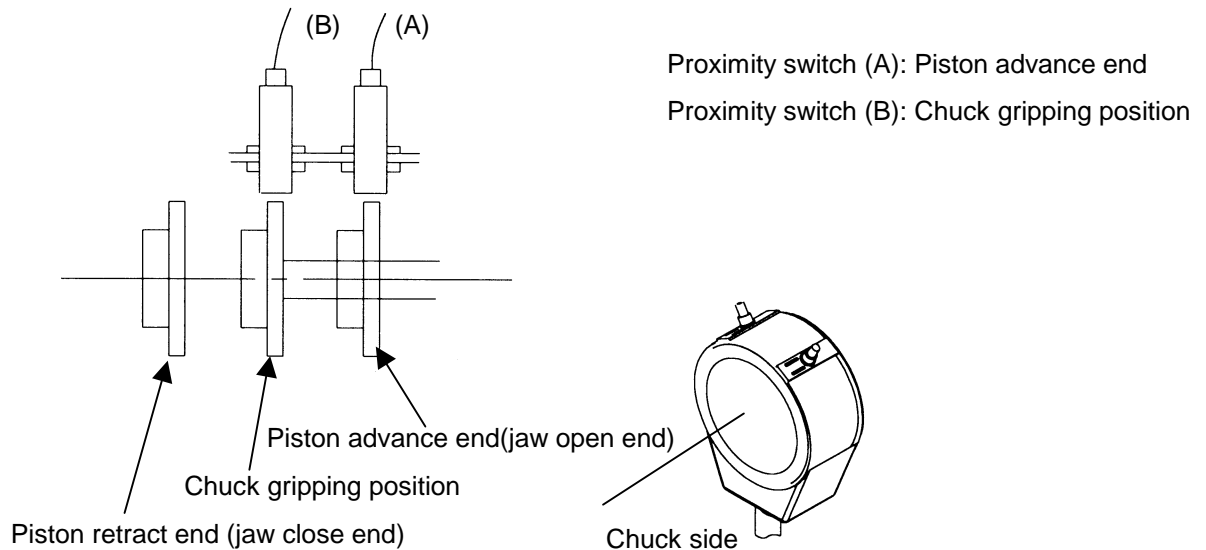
Setting Proximity Switches (OD Chucking)
